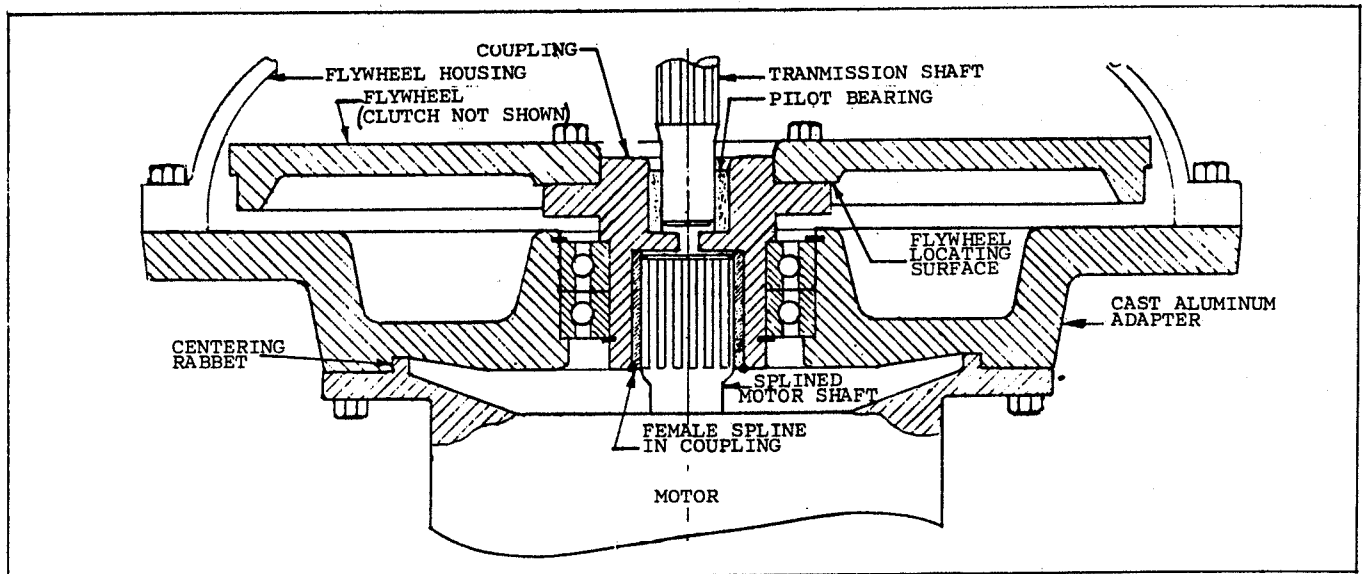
Top view cross section of motor mounted to flywheel housing with cast aluminum adapter with coupling and flywheel supported by bearings.
